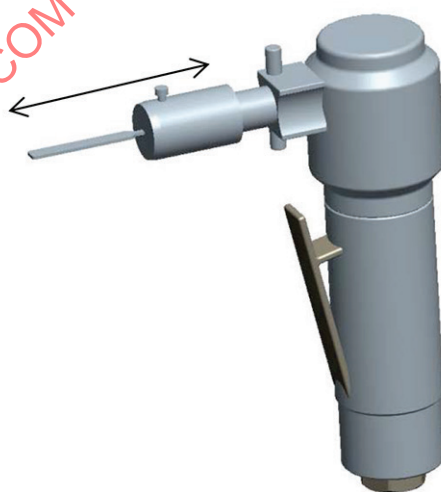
Angle polishing/filing machine with reciprocating action — Designed for single hand held operation
